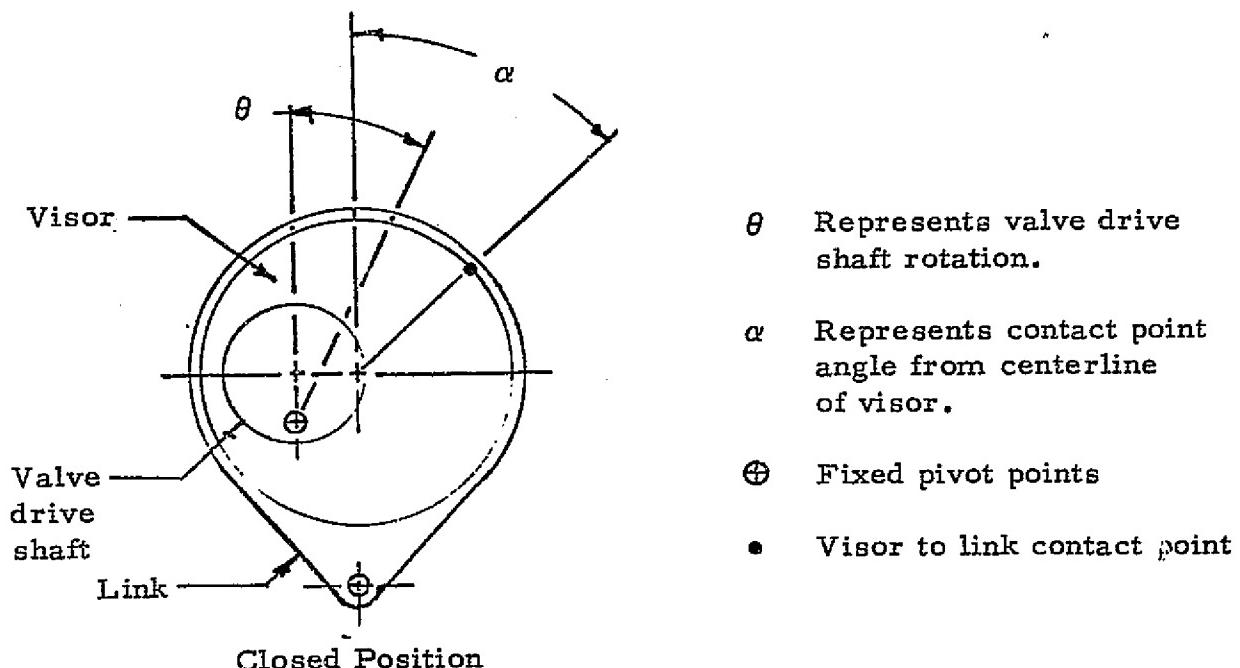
Valve Shaft Angle versus Contact Point Angle Definition
